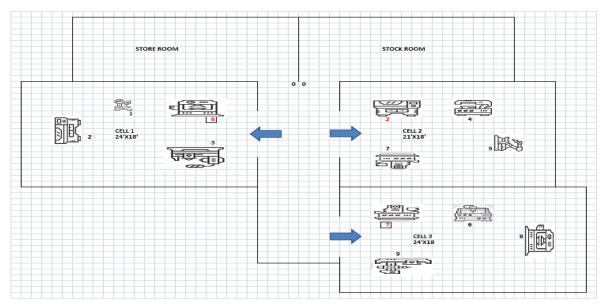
Cell layout design for Bench mark problem 3-9machines x 10 components Bench mark problem
